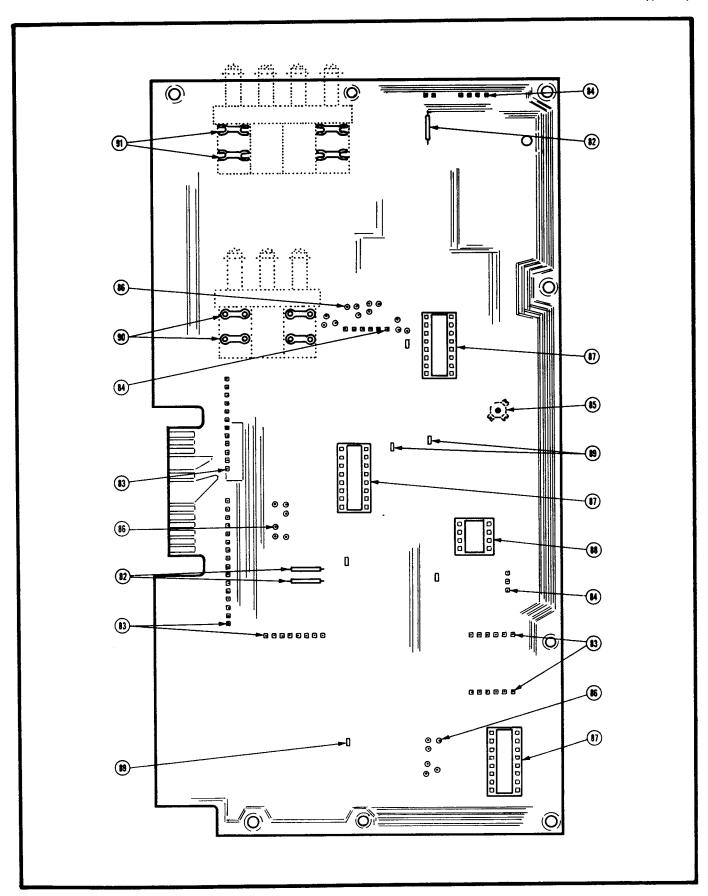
Circuit Board Assembly, Sweep (Sheet 3 of 3).
